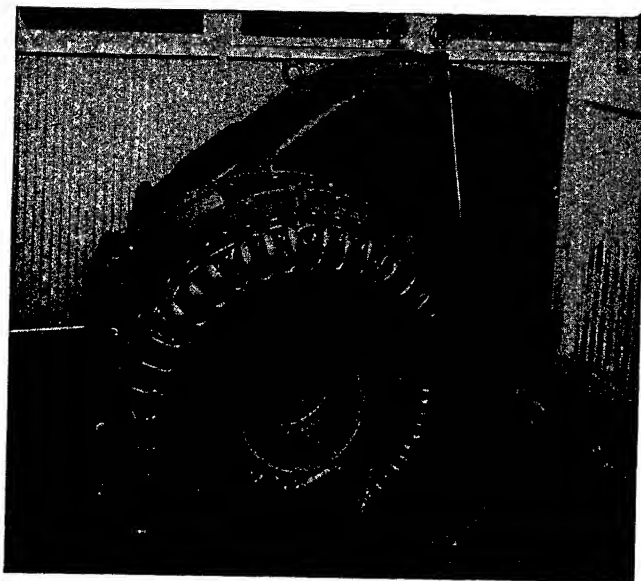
COMBINATION MOTOR AND GEAR DRIVE ON RUBBER MILL
